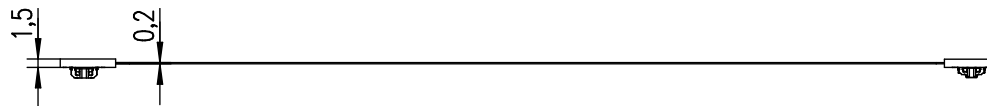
ECU Adapter ETAM4 (Side View)
